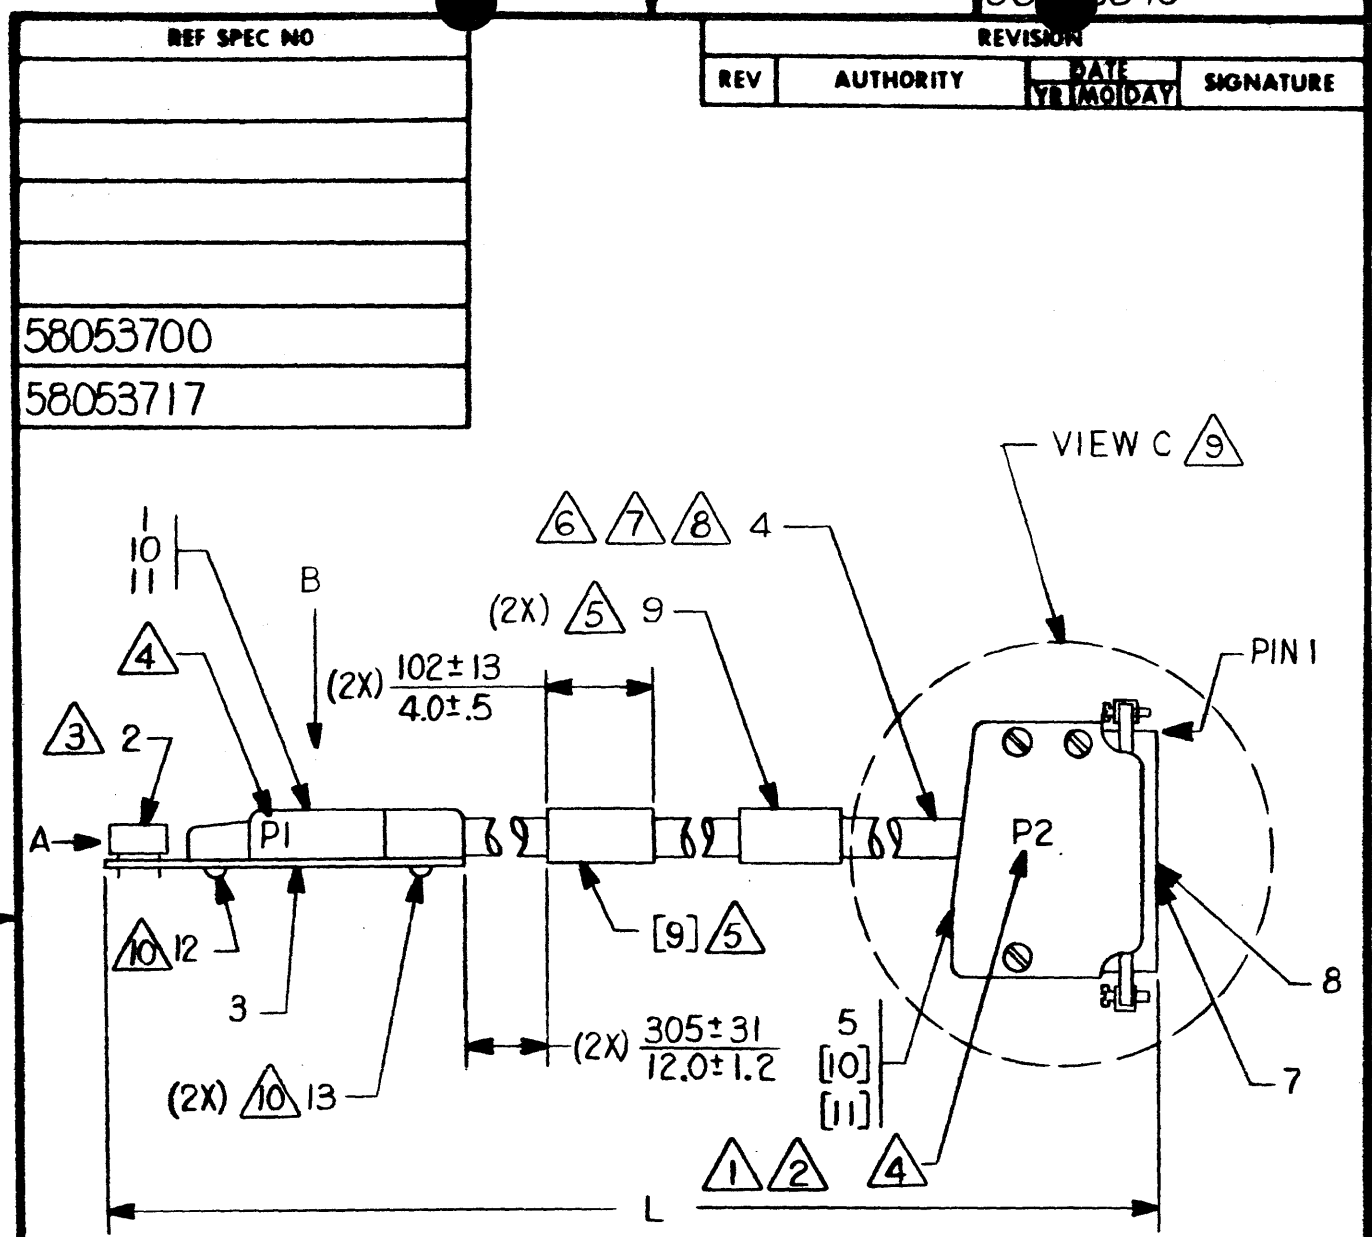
EXTERNAL CABLE ASSEMBLY
